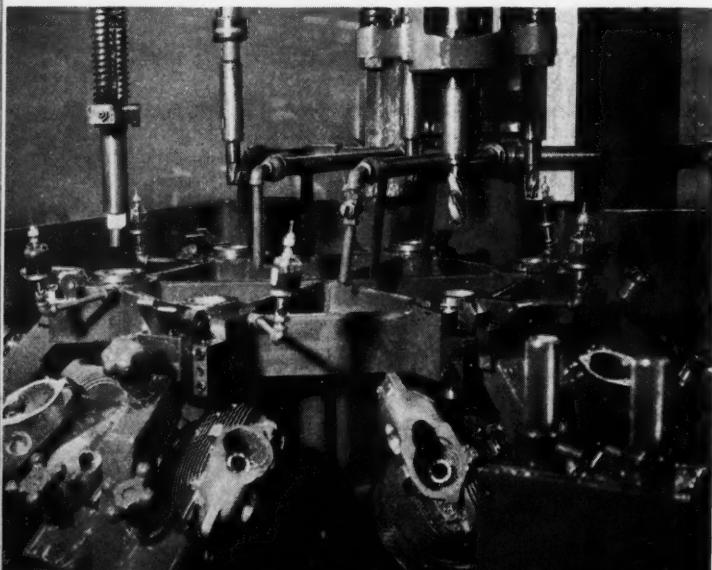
The Spark Plug Holes in the Cylinder Head are Drilled, Reamed, Tapped, and Finish Counterbored in this Five - Spindle Natco Multiple Drilling Machine
